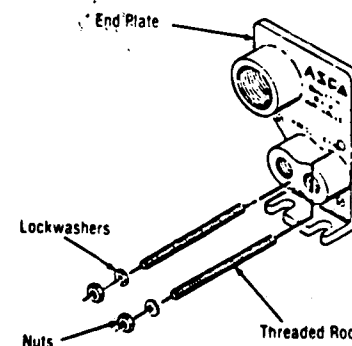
DISASSEMBLING 3-WAY SOLENOID VALVES.
